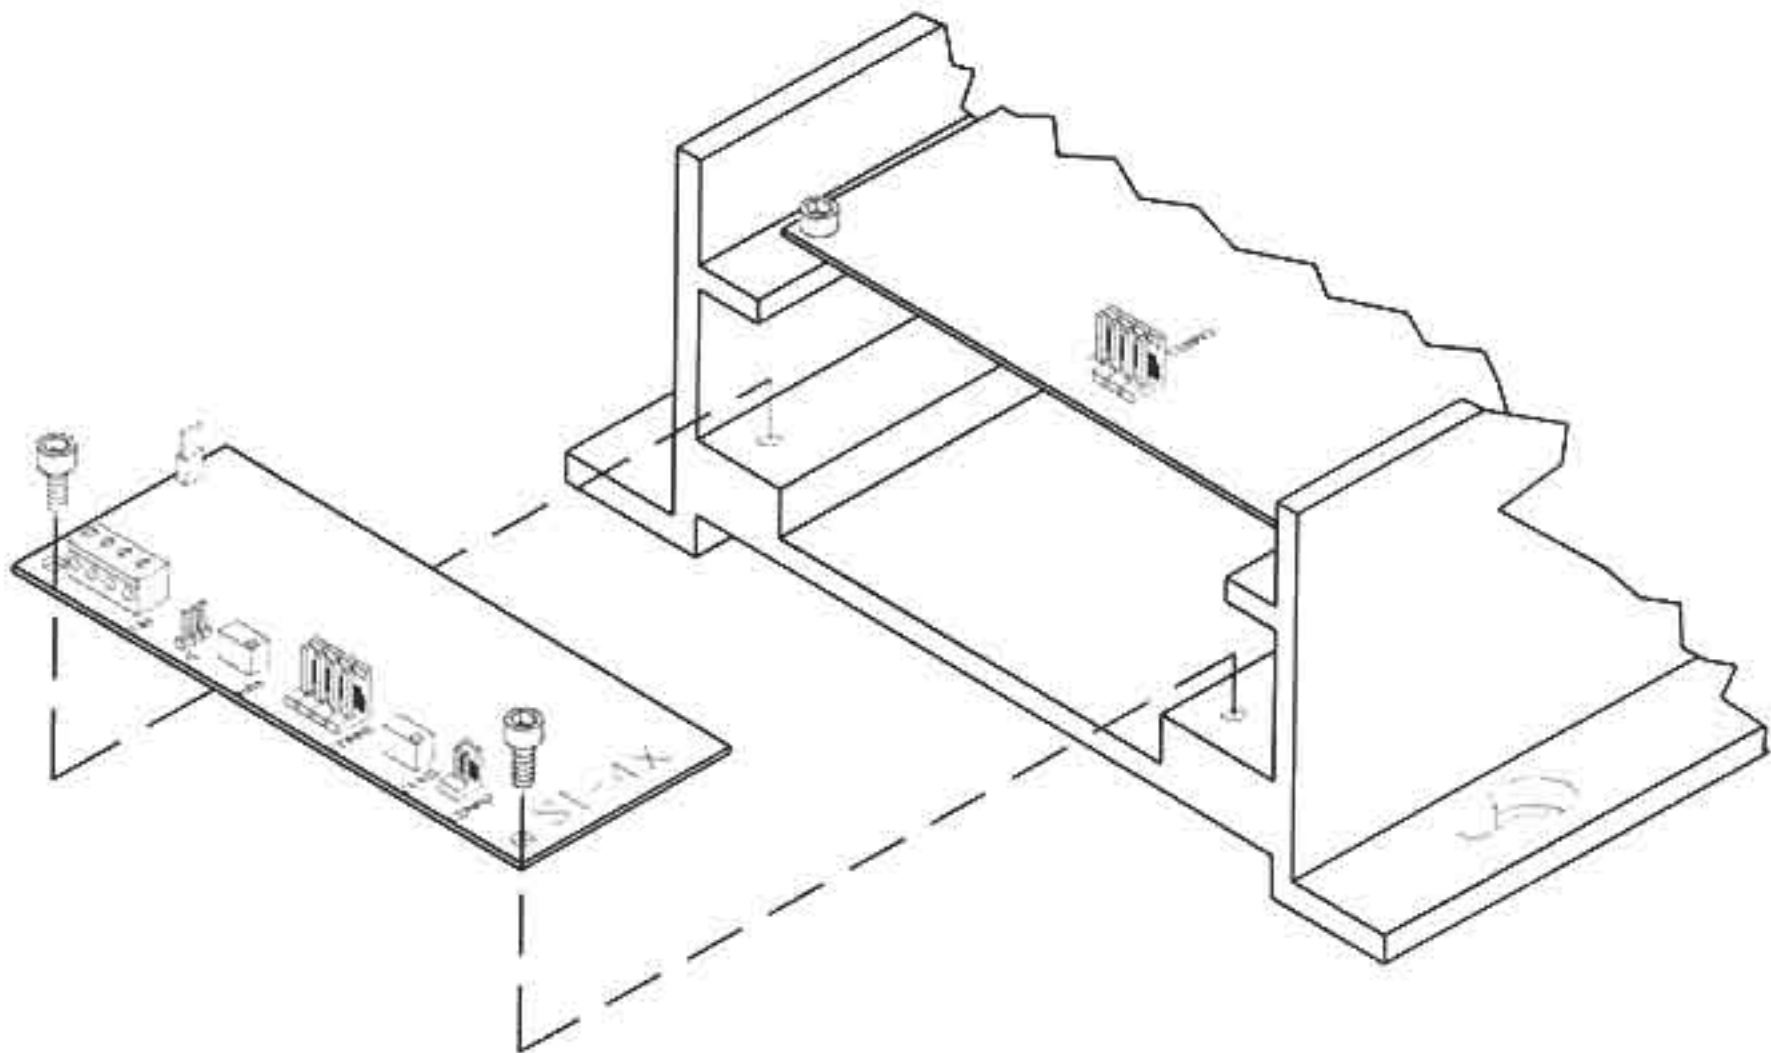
MOUNTING THE SI-4X ON KBRG-225D OR KBRG-255D
